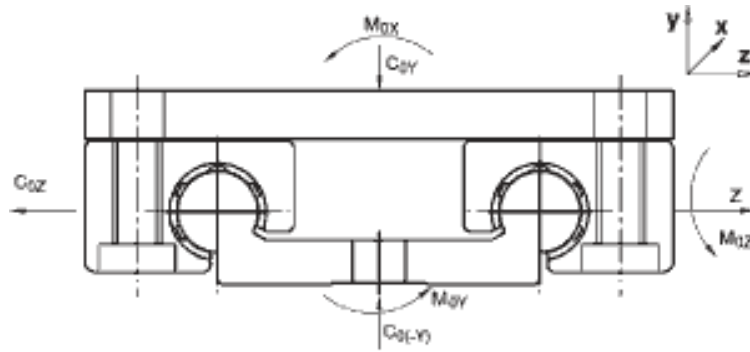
IGUS DRYLIN W SQUARE RAIL AND BEARINGS
